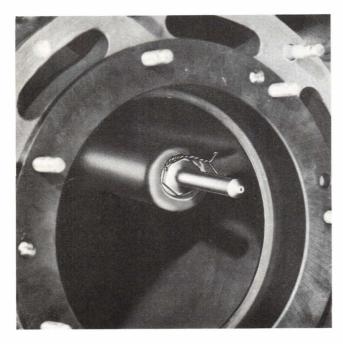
Turbine Rear Bearing Oil Nozzle
